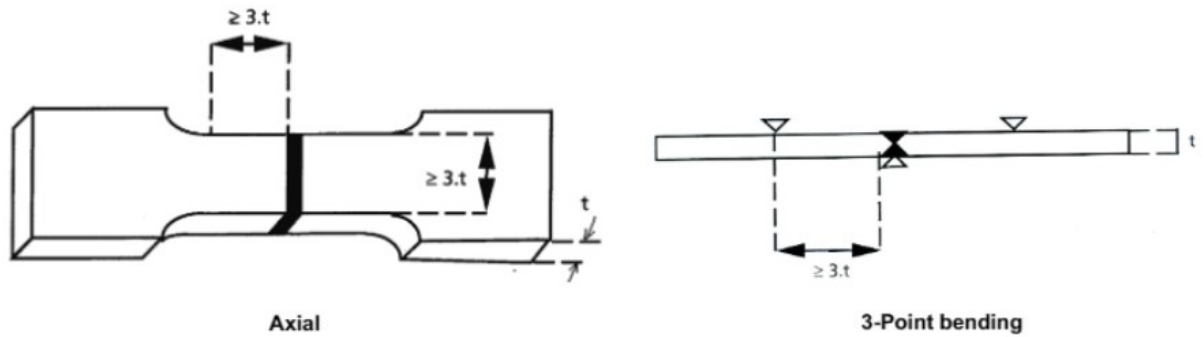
ISO/TR 14345 Dimensional recommendation for samples used in axial and plane bending [54].
